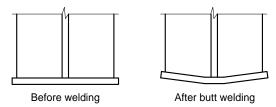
Distortion due to butt welding (exaggerated)
